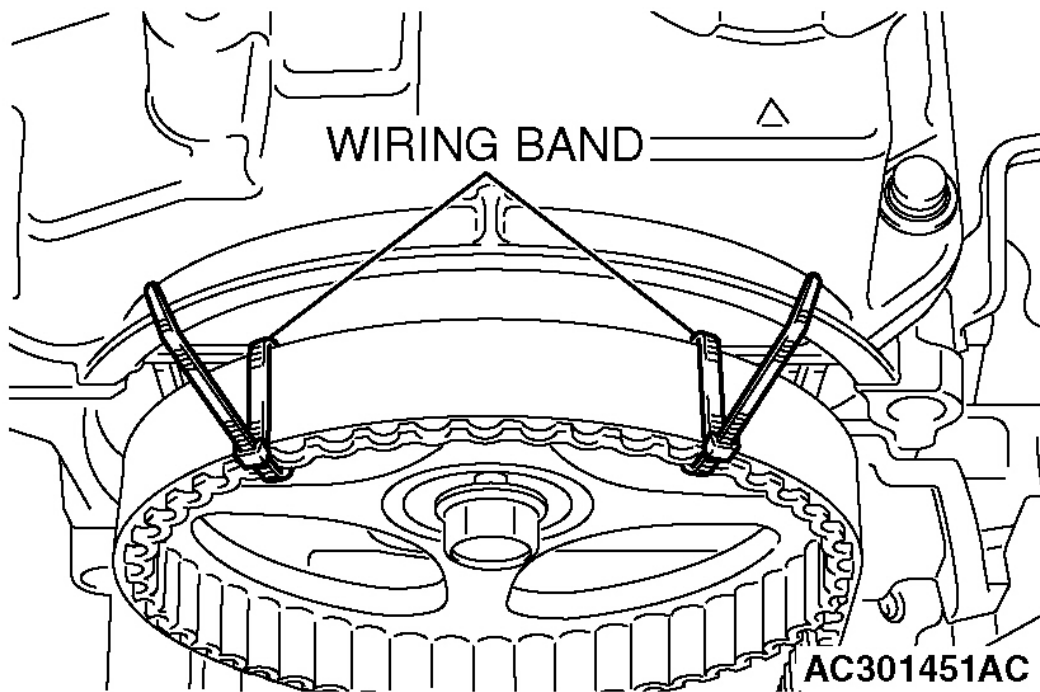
Securing Camshaft Sprocket & Valve Timing Belt With Wiring Bands
